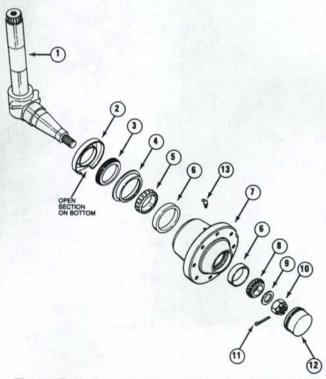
Exploded view of front wheel hub and bearing assembly used on all two-wheel drive tractors. 1. Spindle
